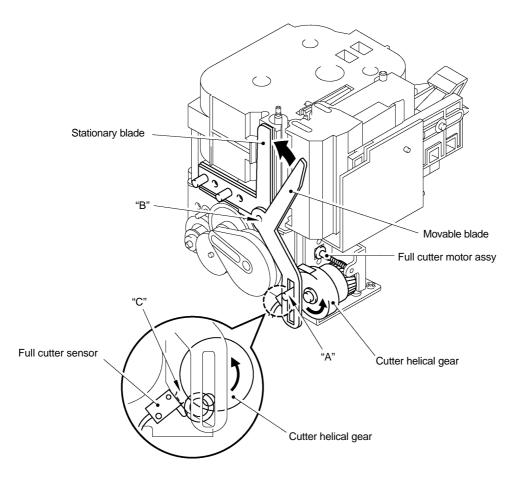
Tape Automatic Full Cutter Mechanism
